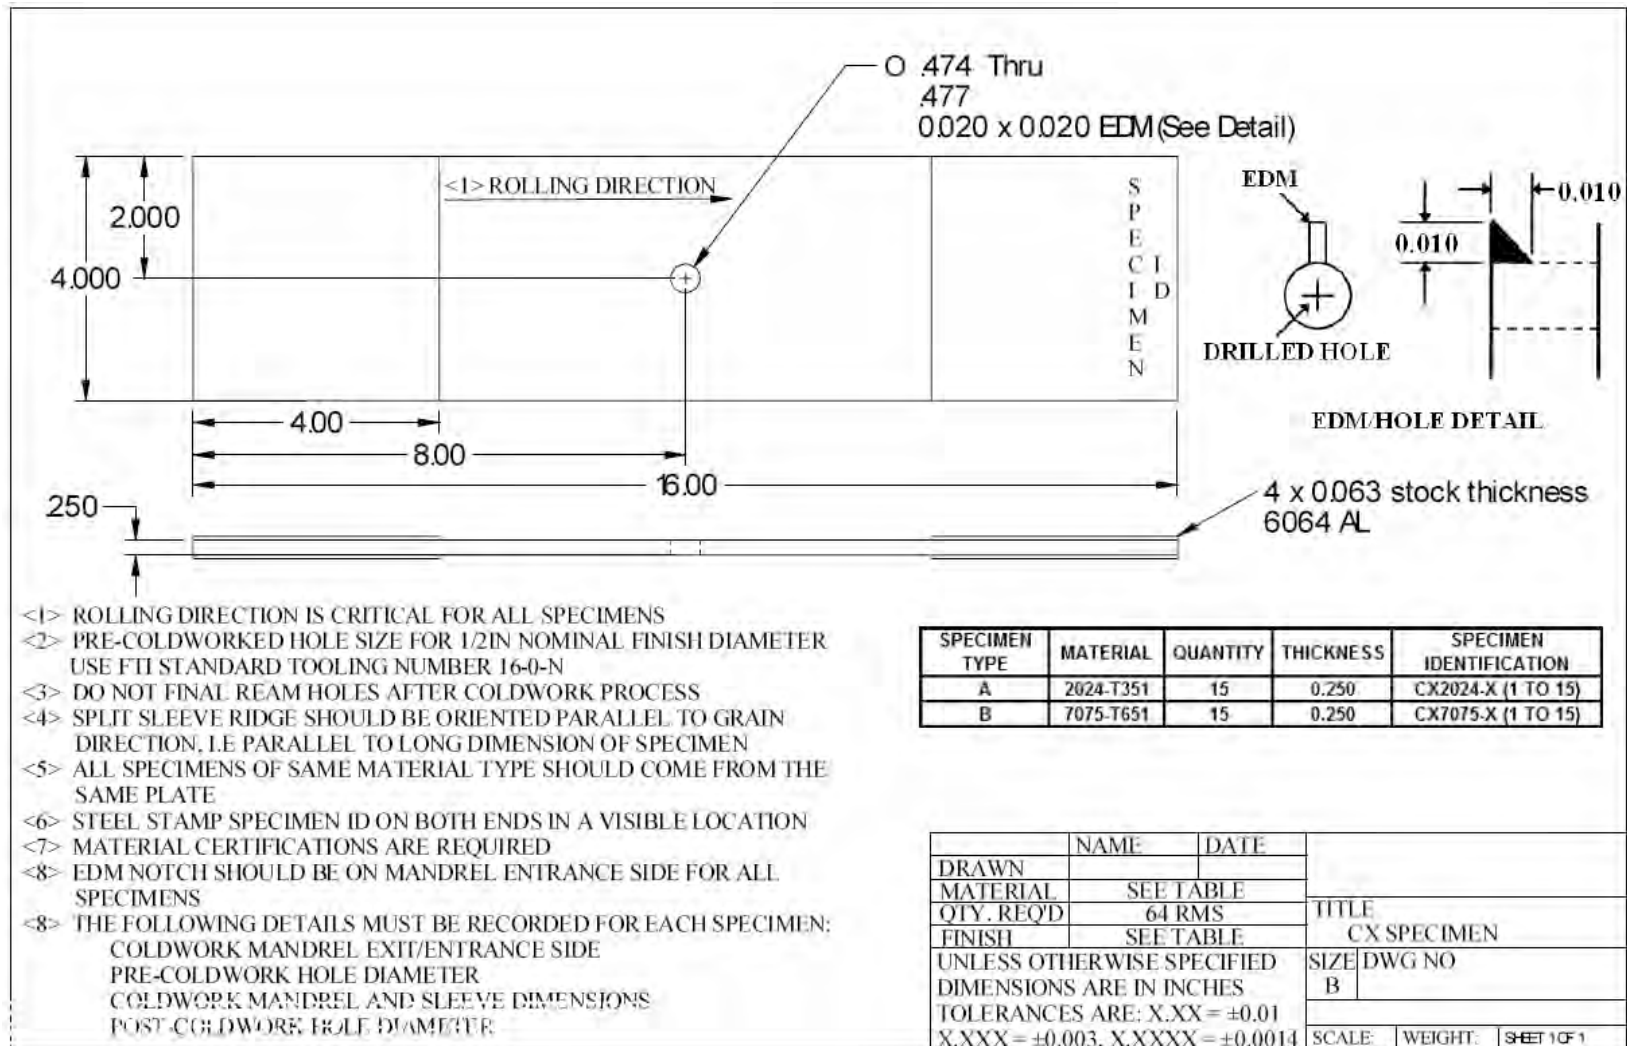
Manufacturing drawing for cold expanded fatigue testing specimens.
